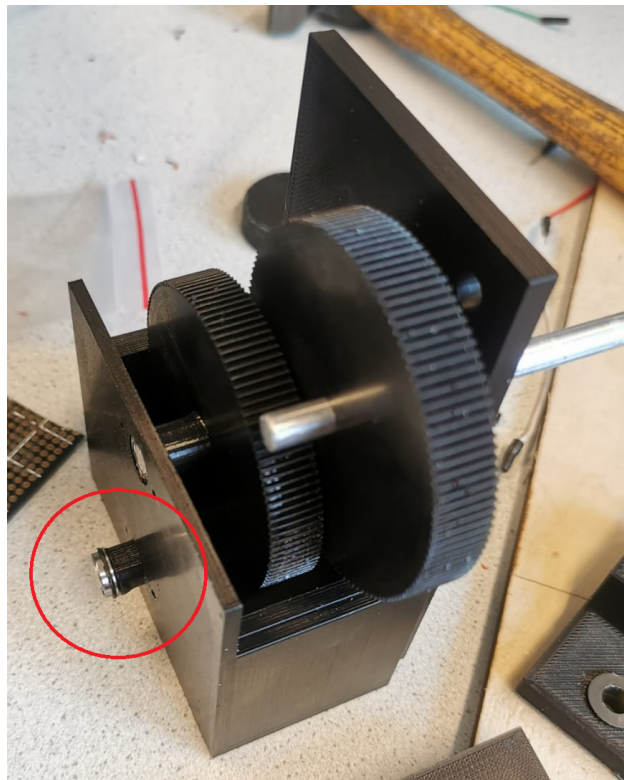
Broken gearbox (broken part seen inside the red circle)
